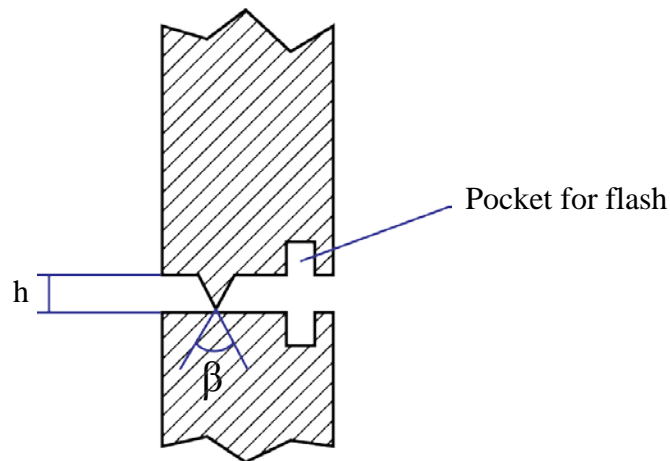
An illustration over the weld seam with “ h ” as the height of the weld.
